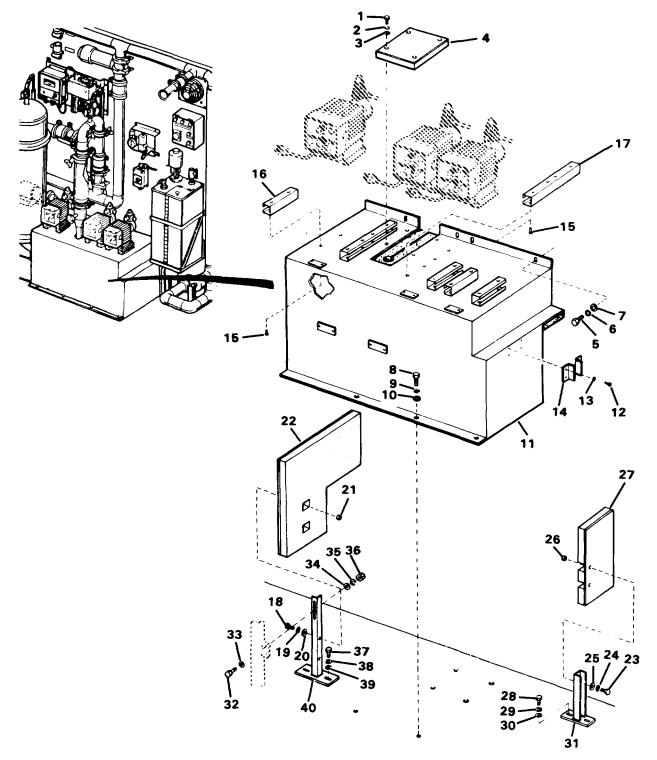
Booster Pump (Sound Enclosure) Cover Assembly
